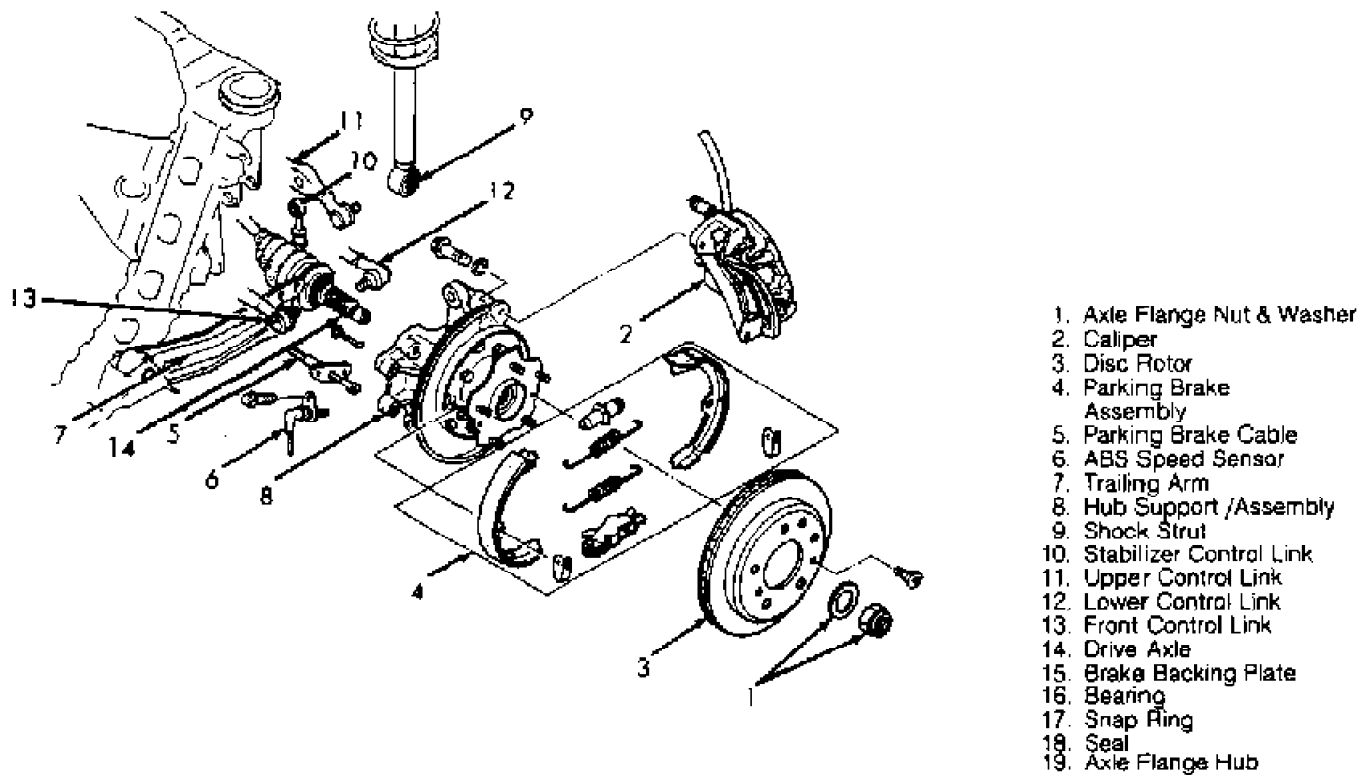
Exploded View Of Rear Hub Assembly (929) (1 of 2)
